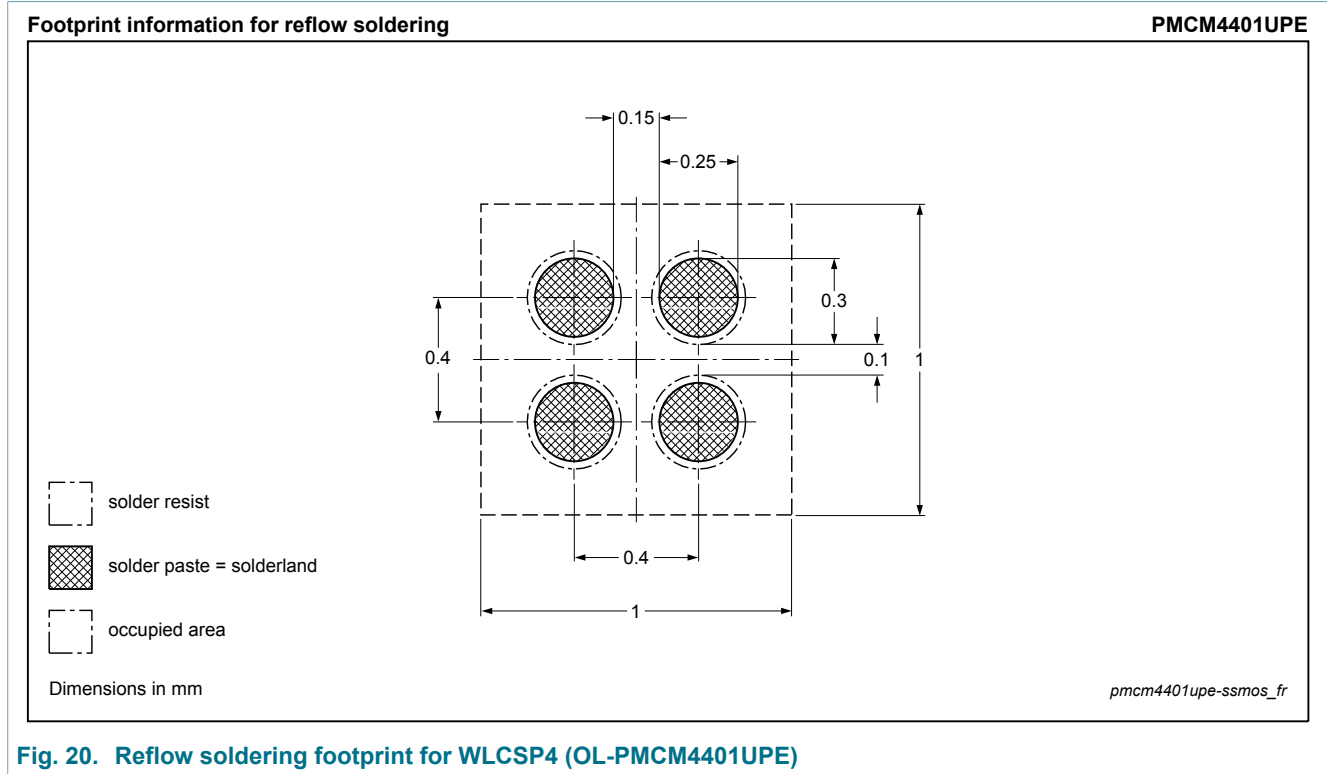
Reflow soldering footprint for WLCSP4 (OL-PMCM4401UPE)
